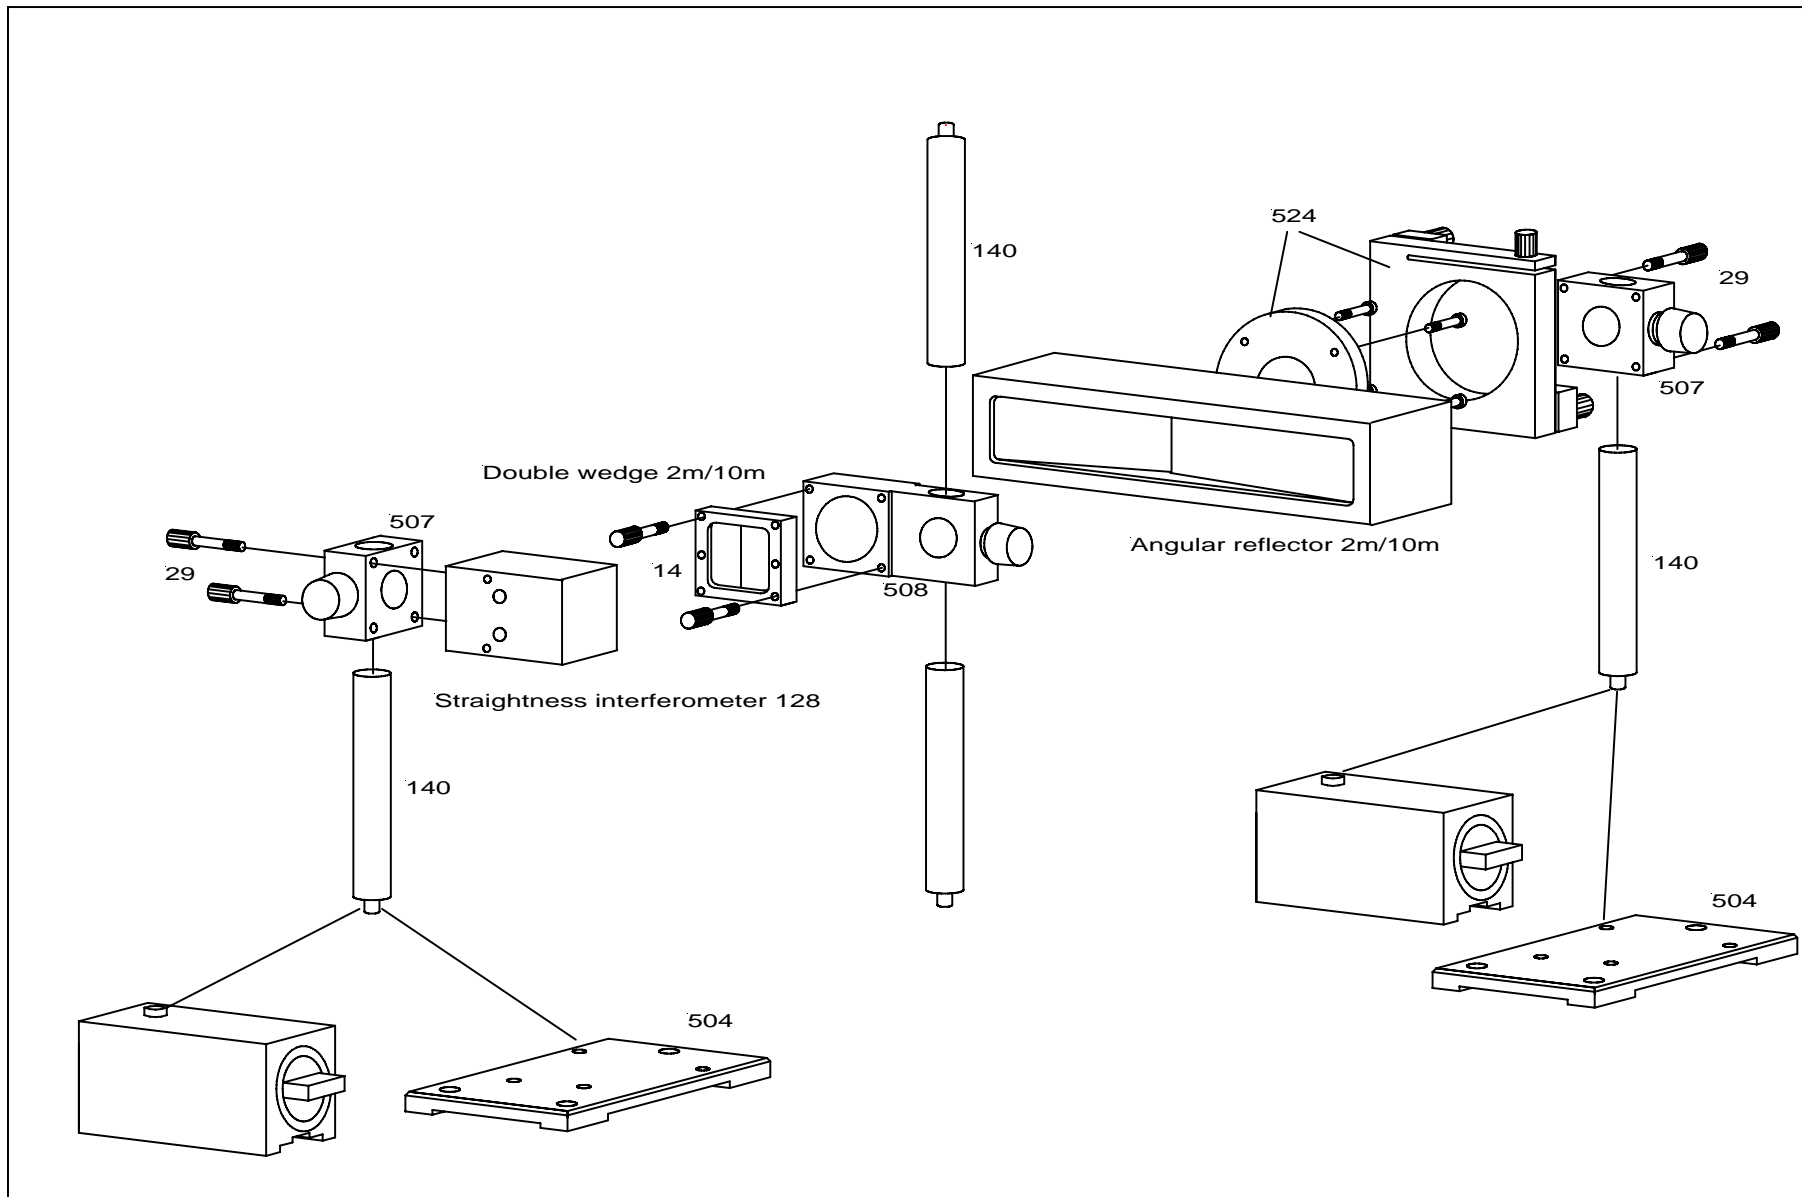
Straightness interferometer, horizontal configuration (assembly drawing)
